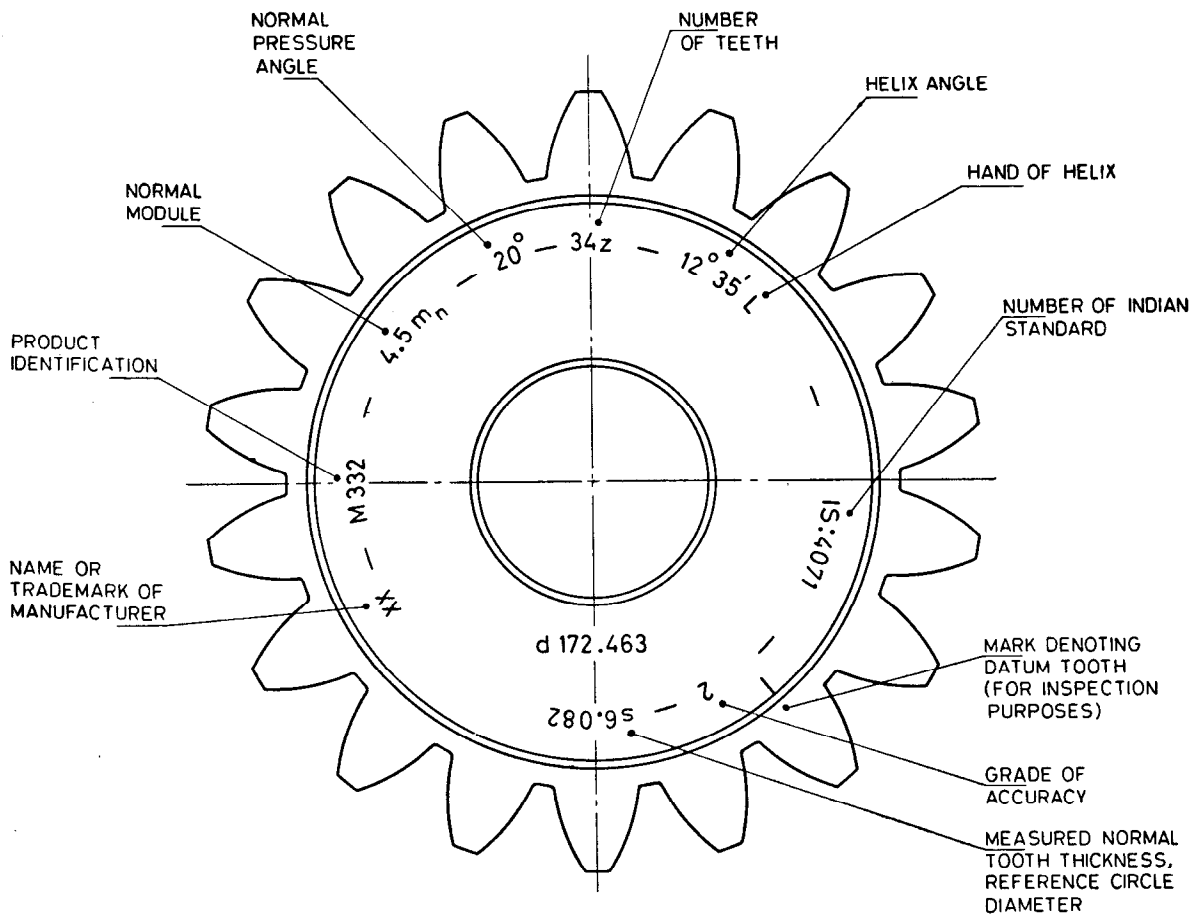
TYPICAL EXAMPLE OF MARKING OF MASTER GEAR
